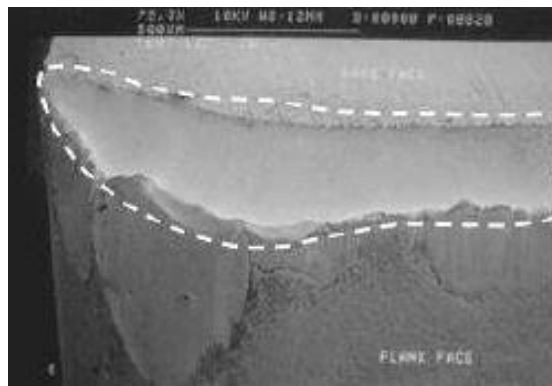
Rake face wear overview of an ISO K20 cemented carbide cutting tool after machining Ti-6Al-4V[29]
